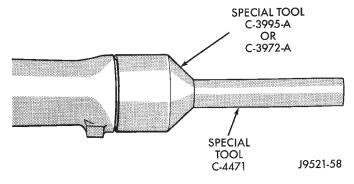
Installing Overdrive Housing Yoke Seal OVERDRIVE HOUSING BUSHING
